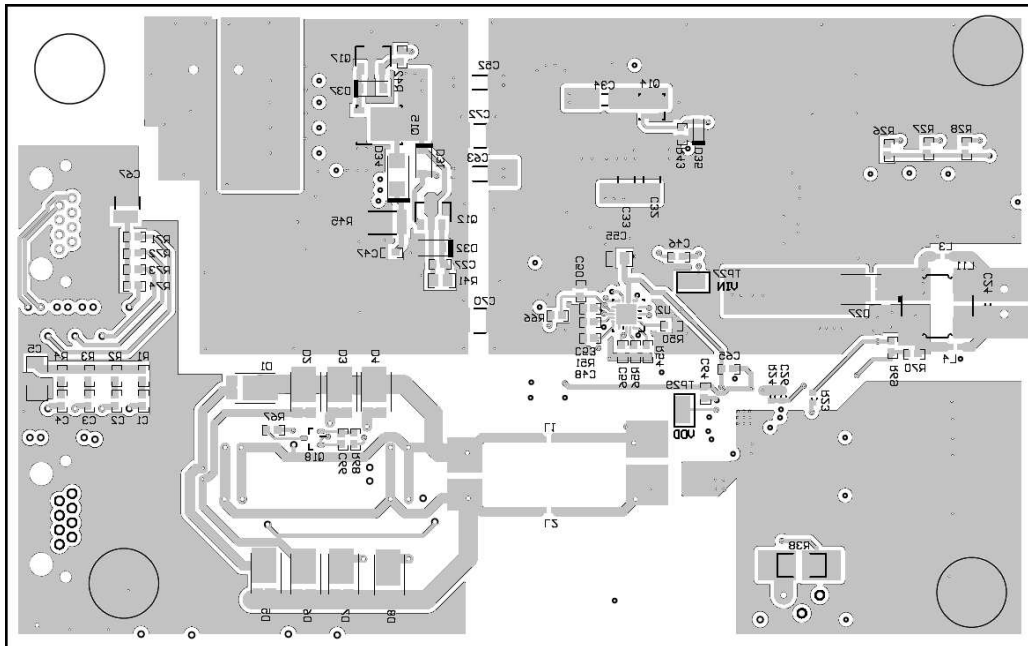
TPS2373-4EVM-758 Bottom Side Layout and Component Placement
